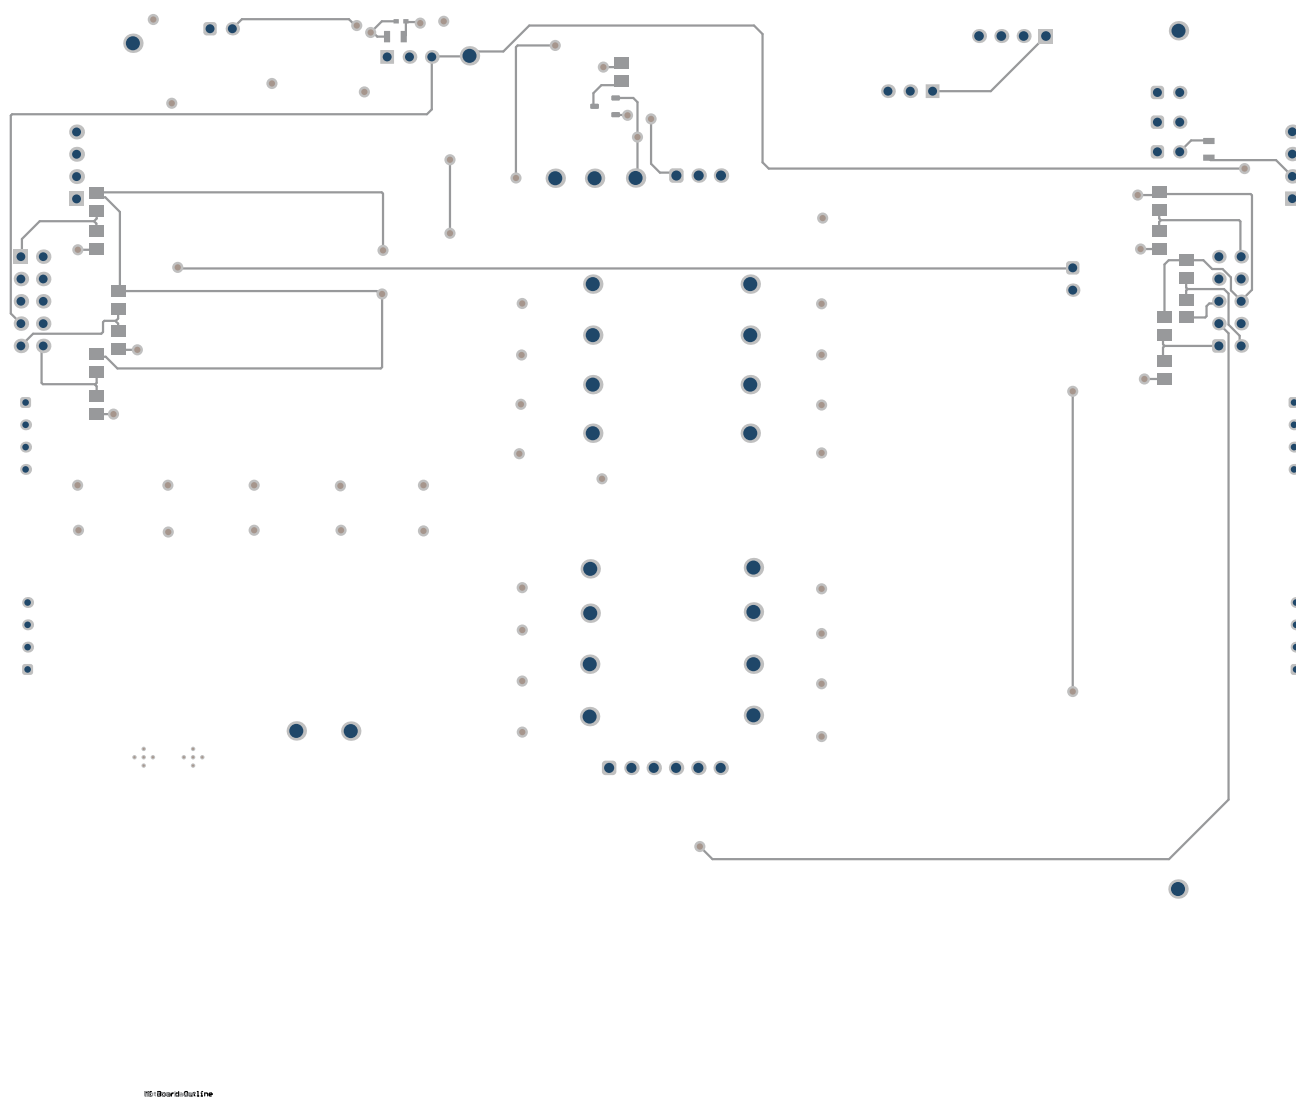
TMUXS7614DEVM Bottom Layer Layout
